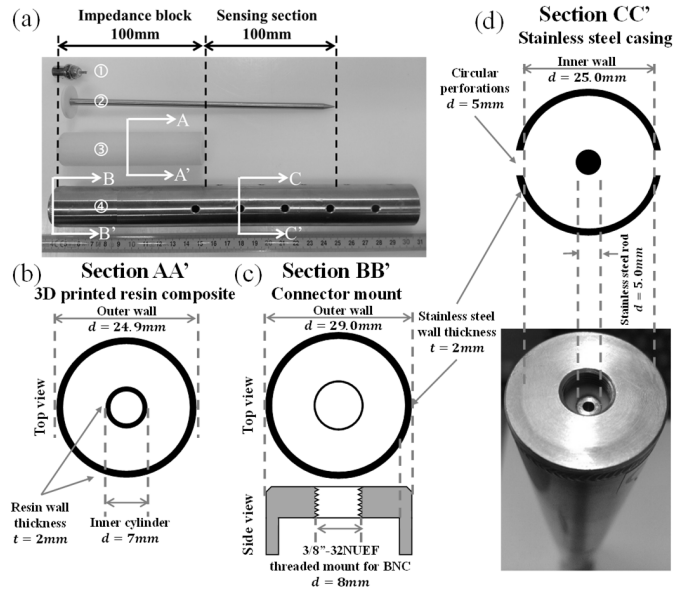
Detailing of RDA-A1 coaxial probe. (a) Image of 3-D printed and lathed components. (b) AA' section of 3-D printed resin dielectric insulator. (c) BB' section of connector mount on top of external casing. (d) CC' section of perforated external casing.
